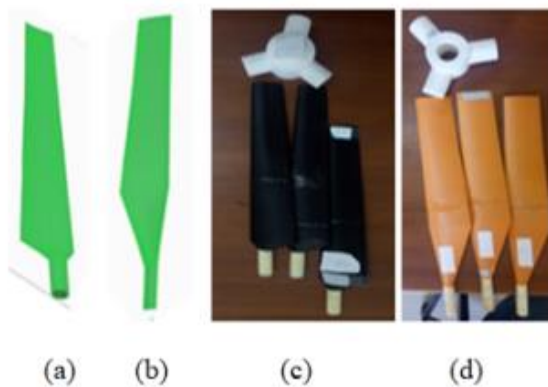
Shapes of blades in three dimensions (a-b) Blade models for R1 and R2 that were 3D printed and then optimized in the Cura program (c, d).
